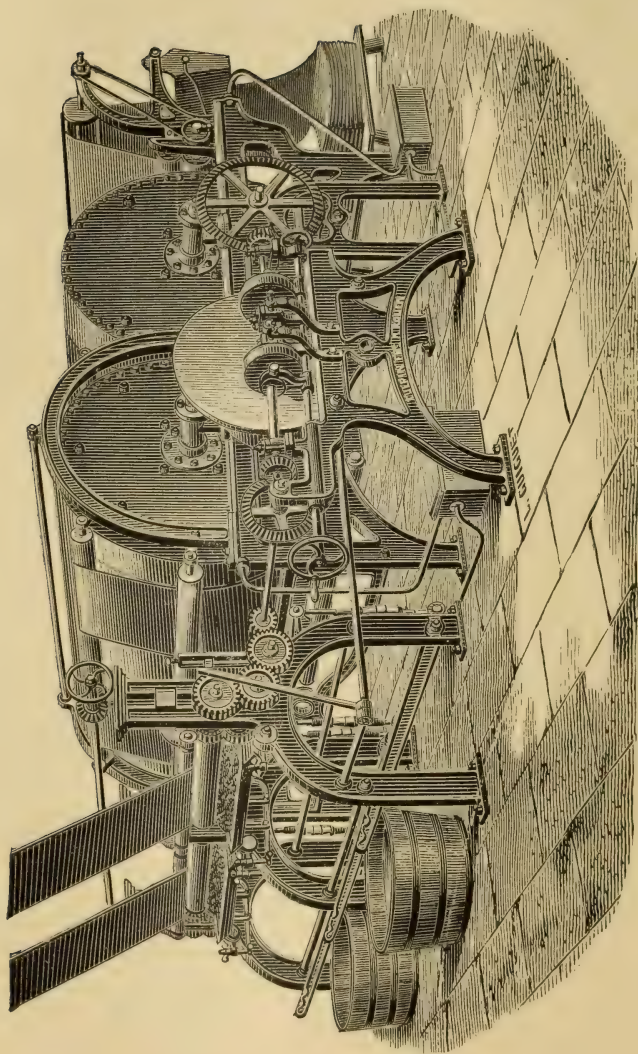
Combined double width starch mangle and two large cylinder drying machine.
